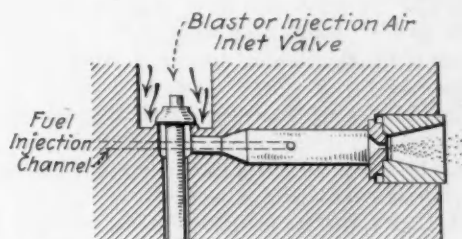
OPEN NOZZLE TYPE FUEL VALVE
